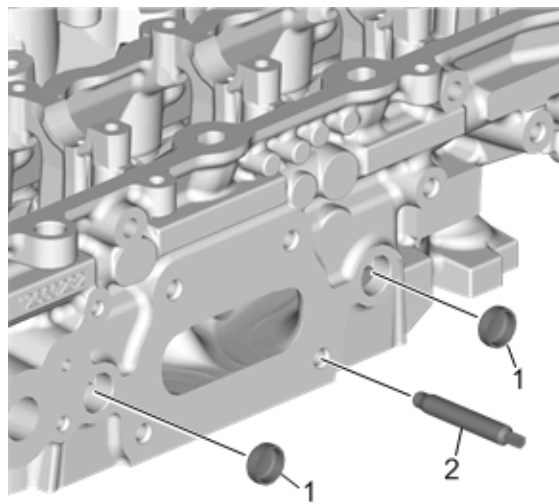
Side Cylinder Head Oil Gallery Plugs And Studs
